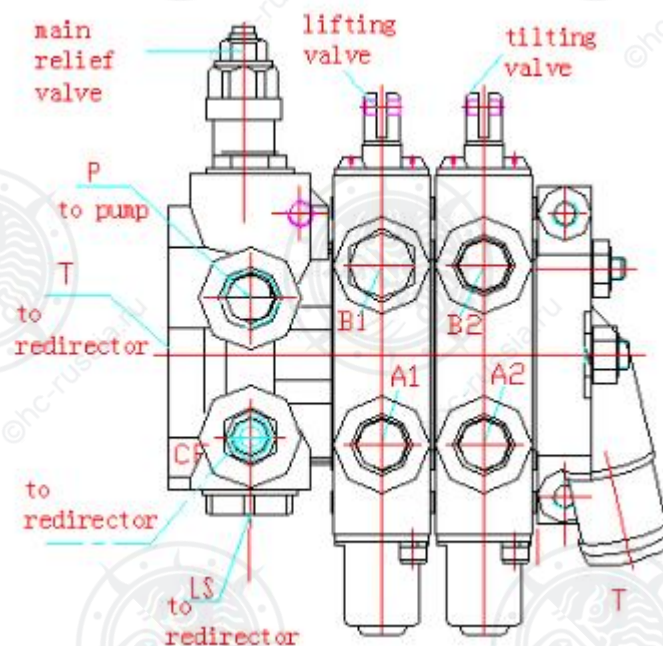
Control valve for 1t~3.5t forklift truck(Load sensing type hydraulic steering gear)
